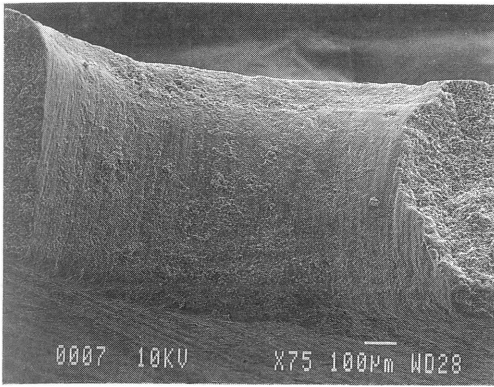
SEM image of a drill hole completely worn into a cylindrical, grooved surface (X 75). See Type A in Fig. 24.
